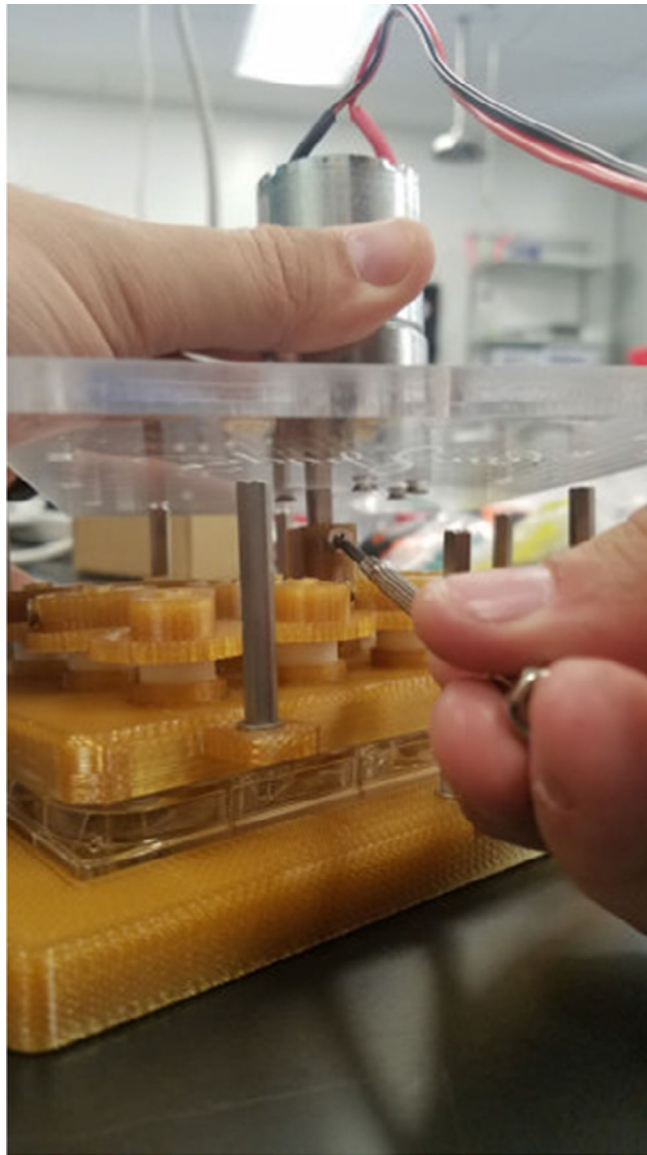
Attachment of the beveled side of the motor shaft into the Motor Shaft Gear.
